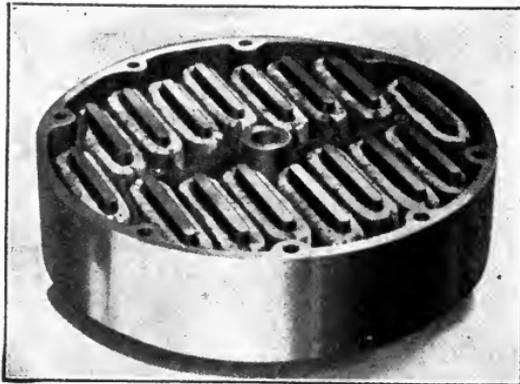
View of Magnetic Chuck Casting and Unit Coils
